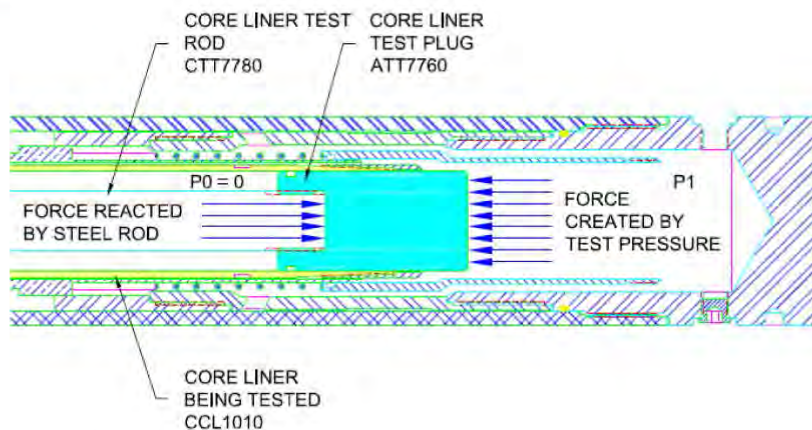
Internally balanced test rod assembly keeps axial compression forces from affecting core liner.
